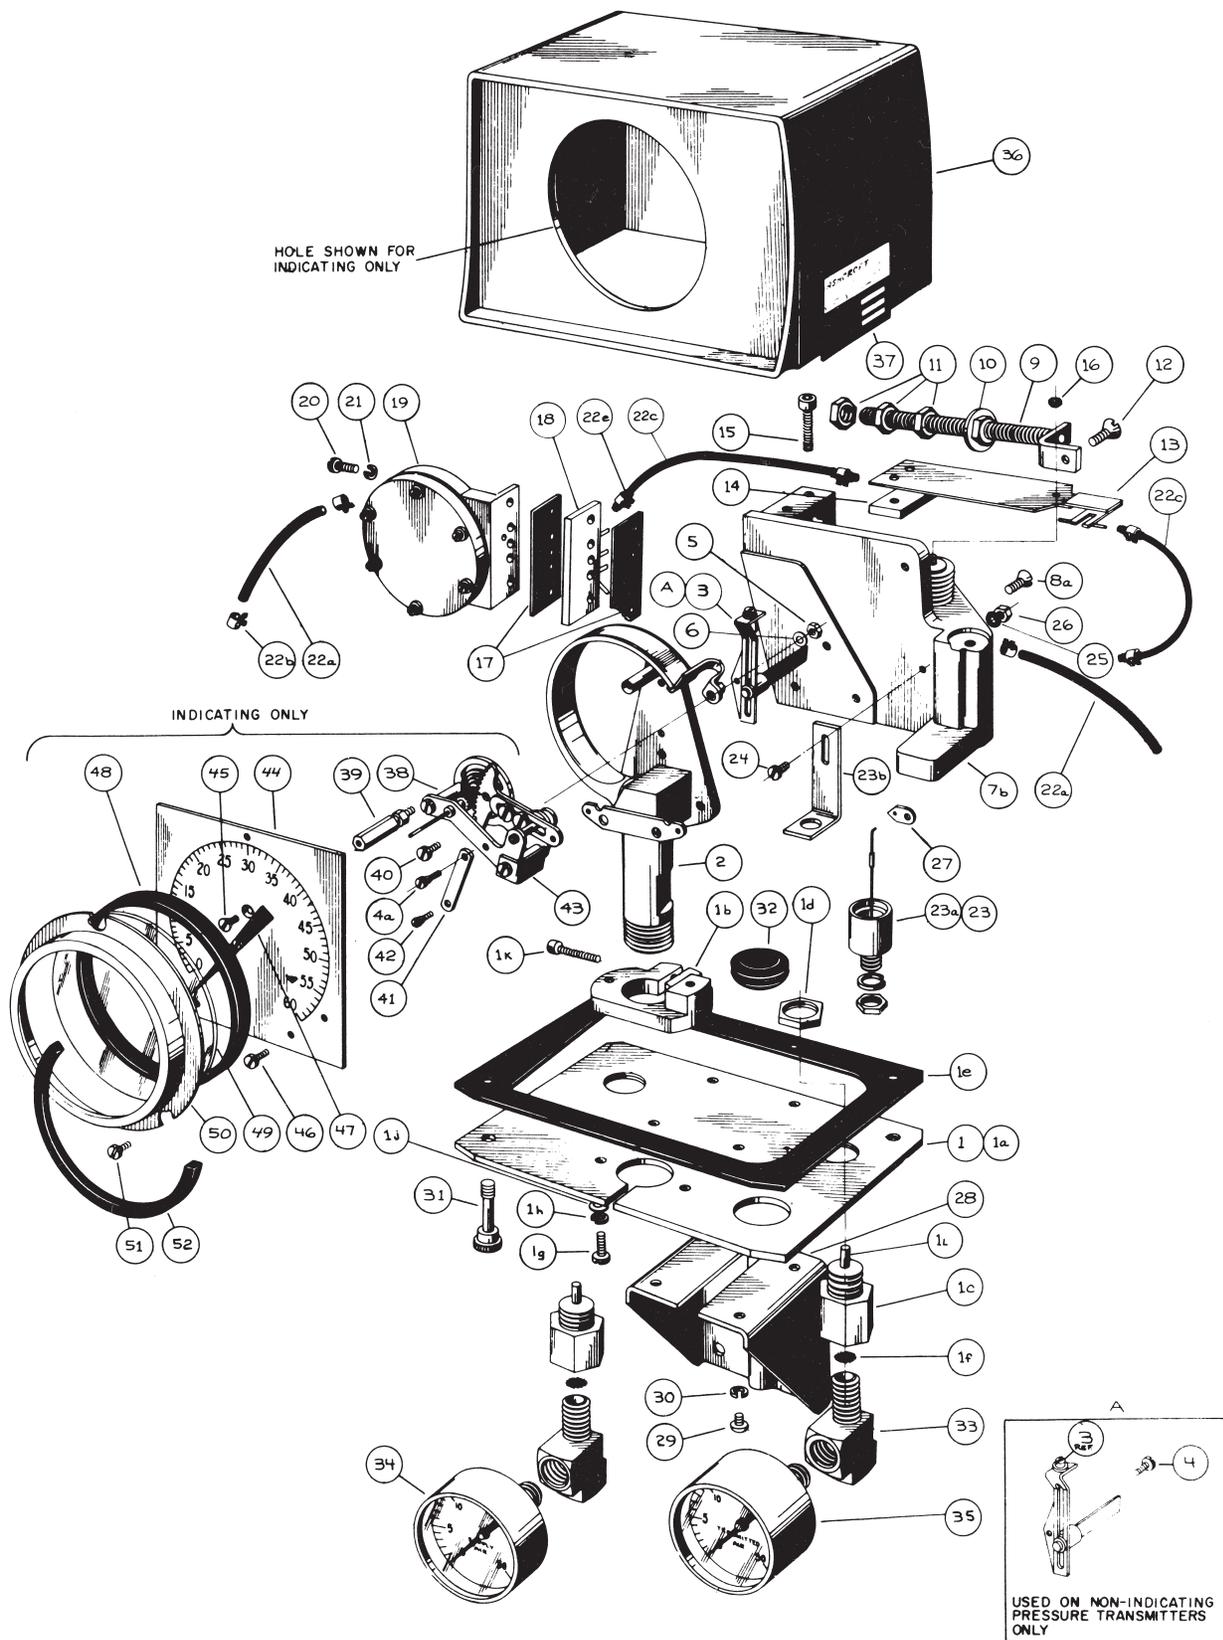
Indicating and Non-Indicating Pressure Transmitter, Series 45-C4080 and Series 45-C4480
